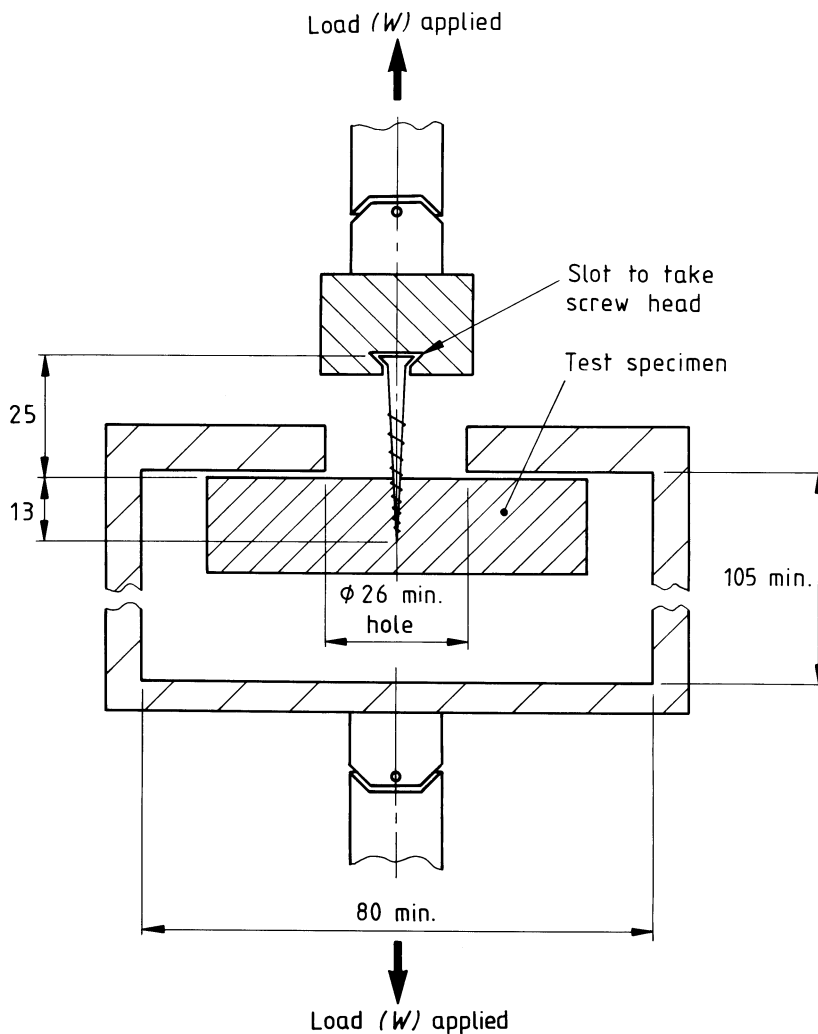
Stirrups for supporting the test specimen and applying a load to the screw head
